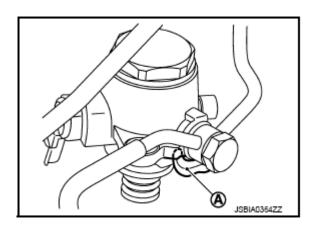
Identifying Fuel Hose Contact Fuel Pump Rotation Stopper Courtesy of NISSAN NORTH AMERICA, INC.
